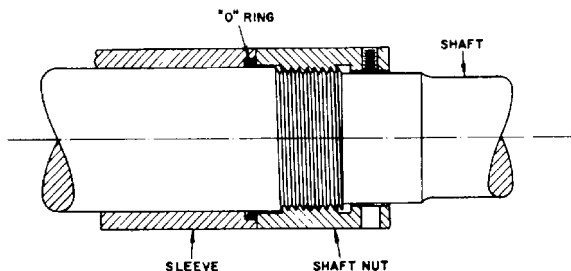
A seal arrangement for the shaft sleeve to prevent leakage along the shaft
